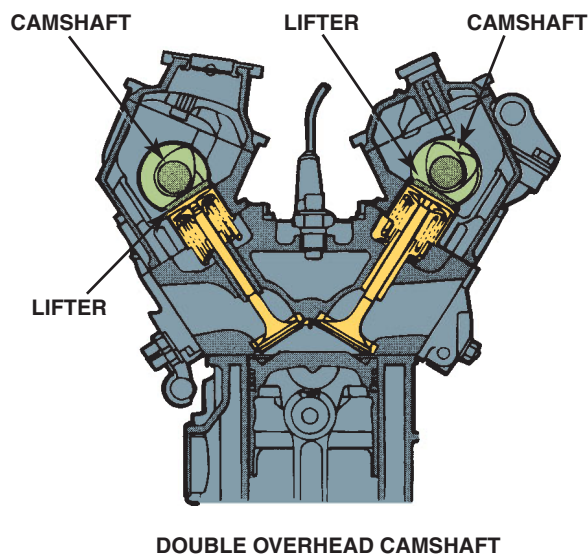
An example of a double overhead camshaft (DOHC) engine [6].
